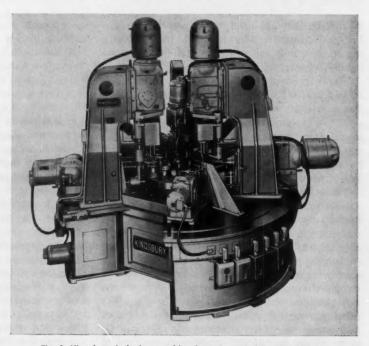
Kingsbury indexing machine featuring rotating work-fixtures
